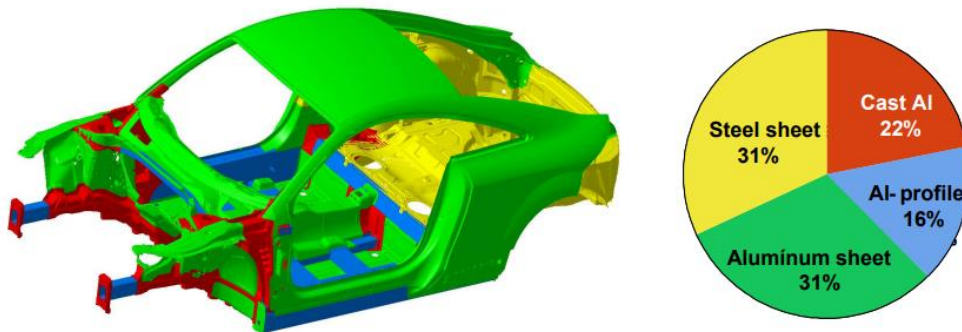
The multi-material car concept in car body manufacturing [4] .
